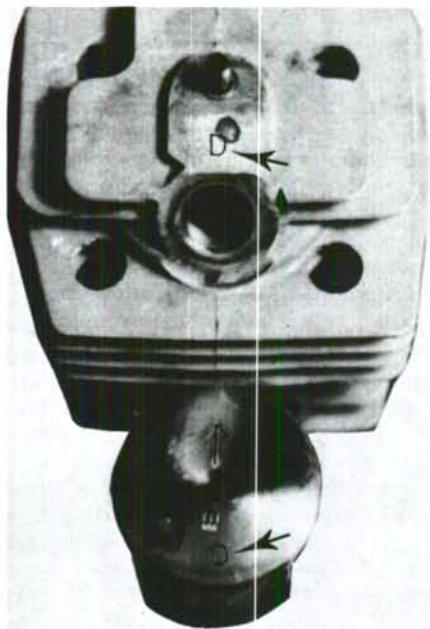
View showing location of cylinder and piston grade letters. Grade "D" is shown.
